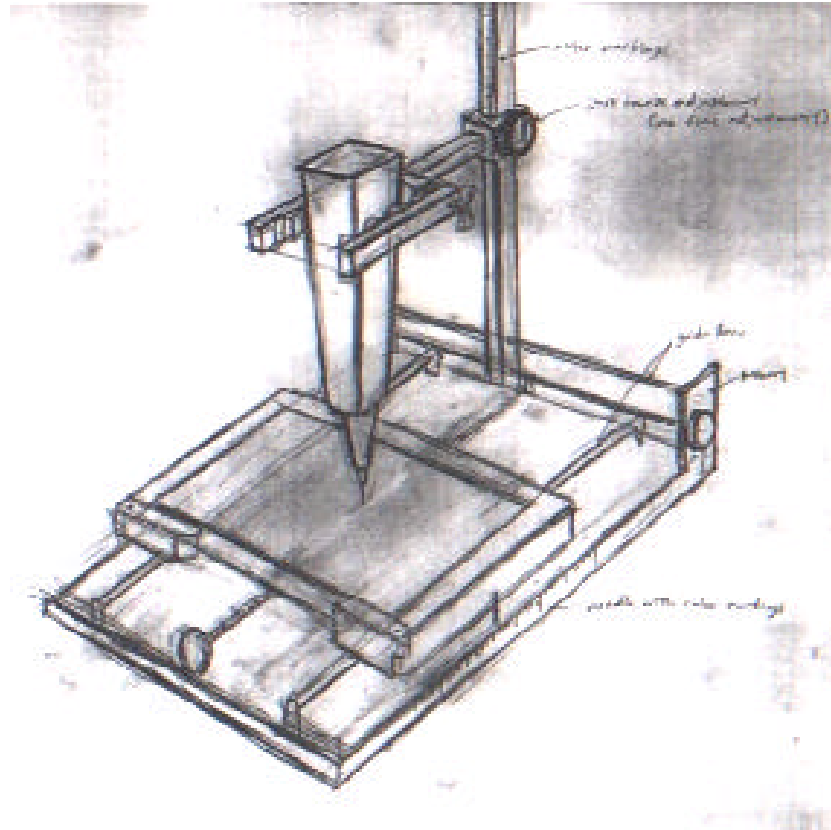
A rough sketch of the modified stand design. This design eliminated the need for gearboxes. It still can change the location of the probe and plate in all three dimensions. Marking devices are still on the device, though not as accessible as in the first design option.
